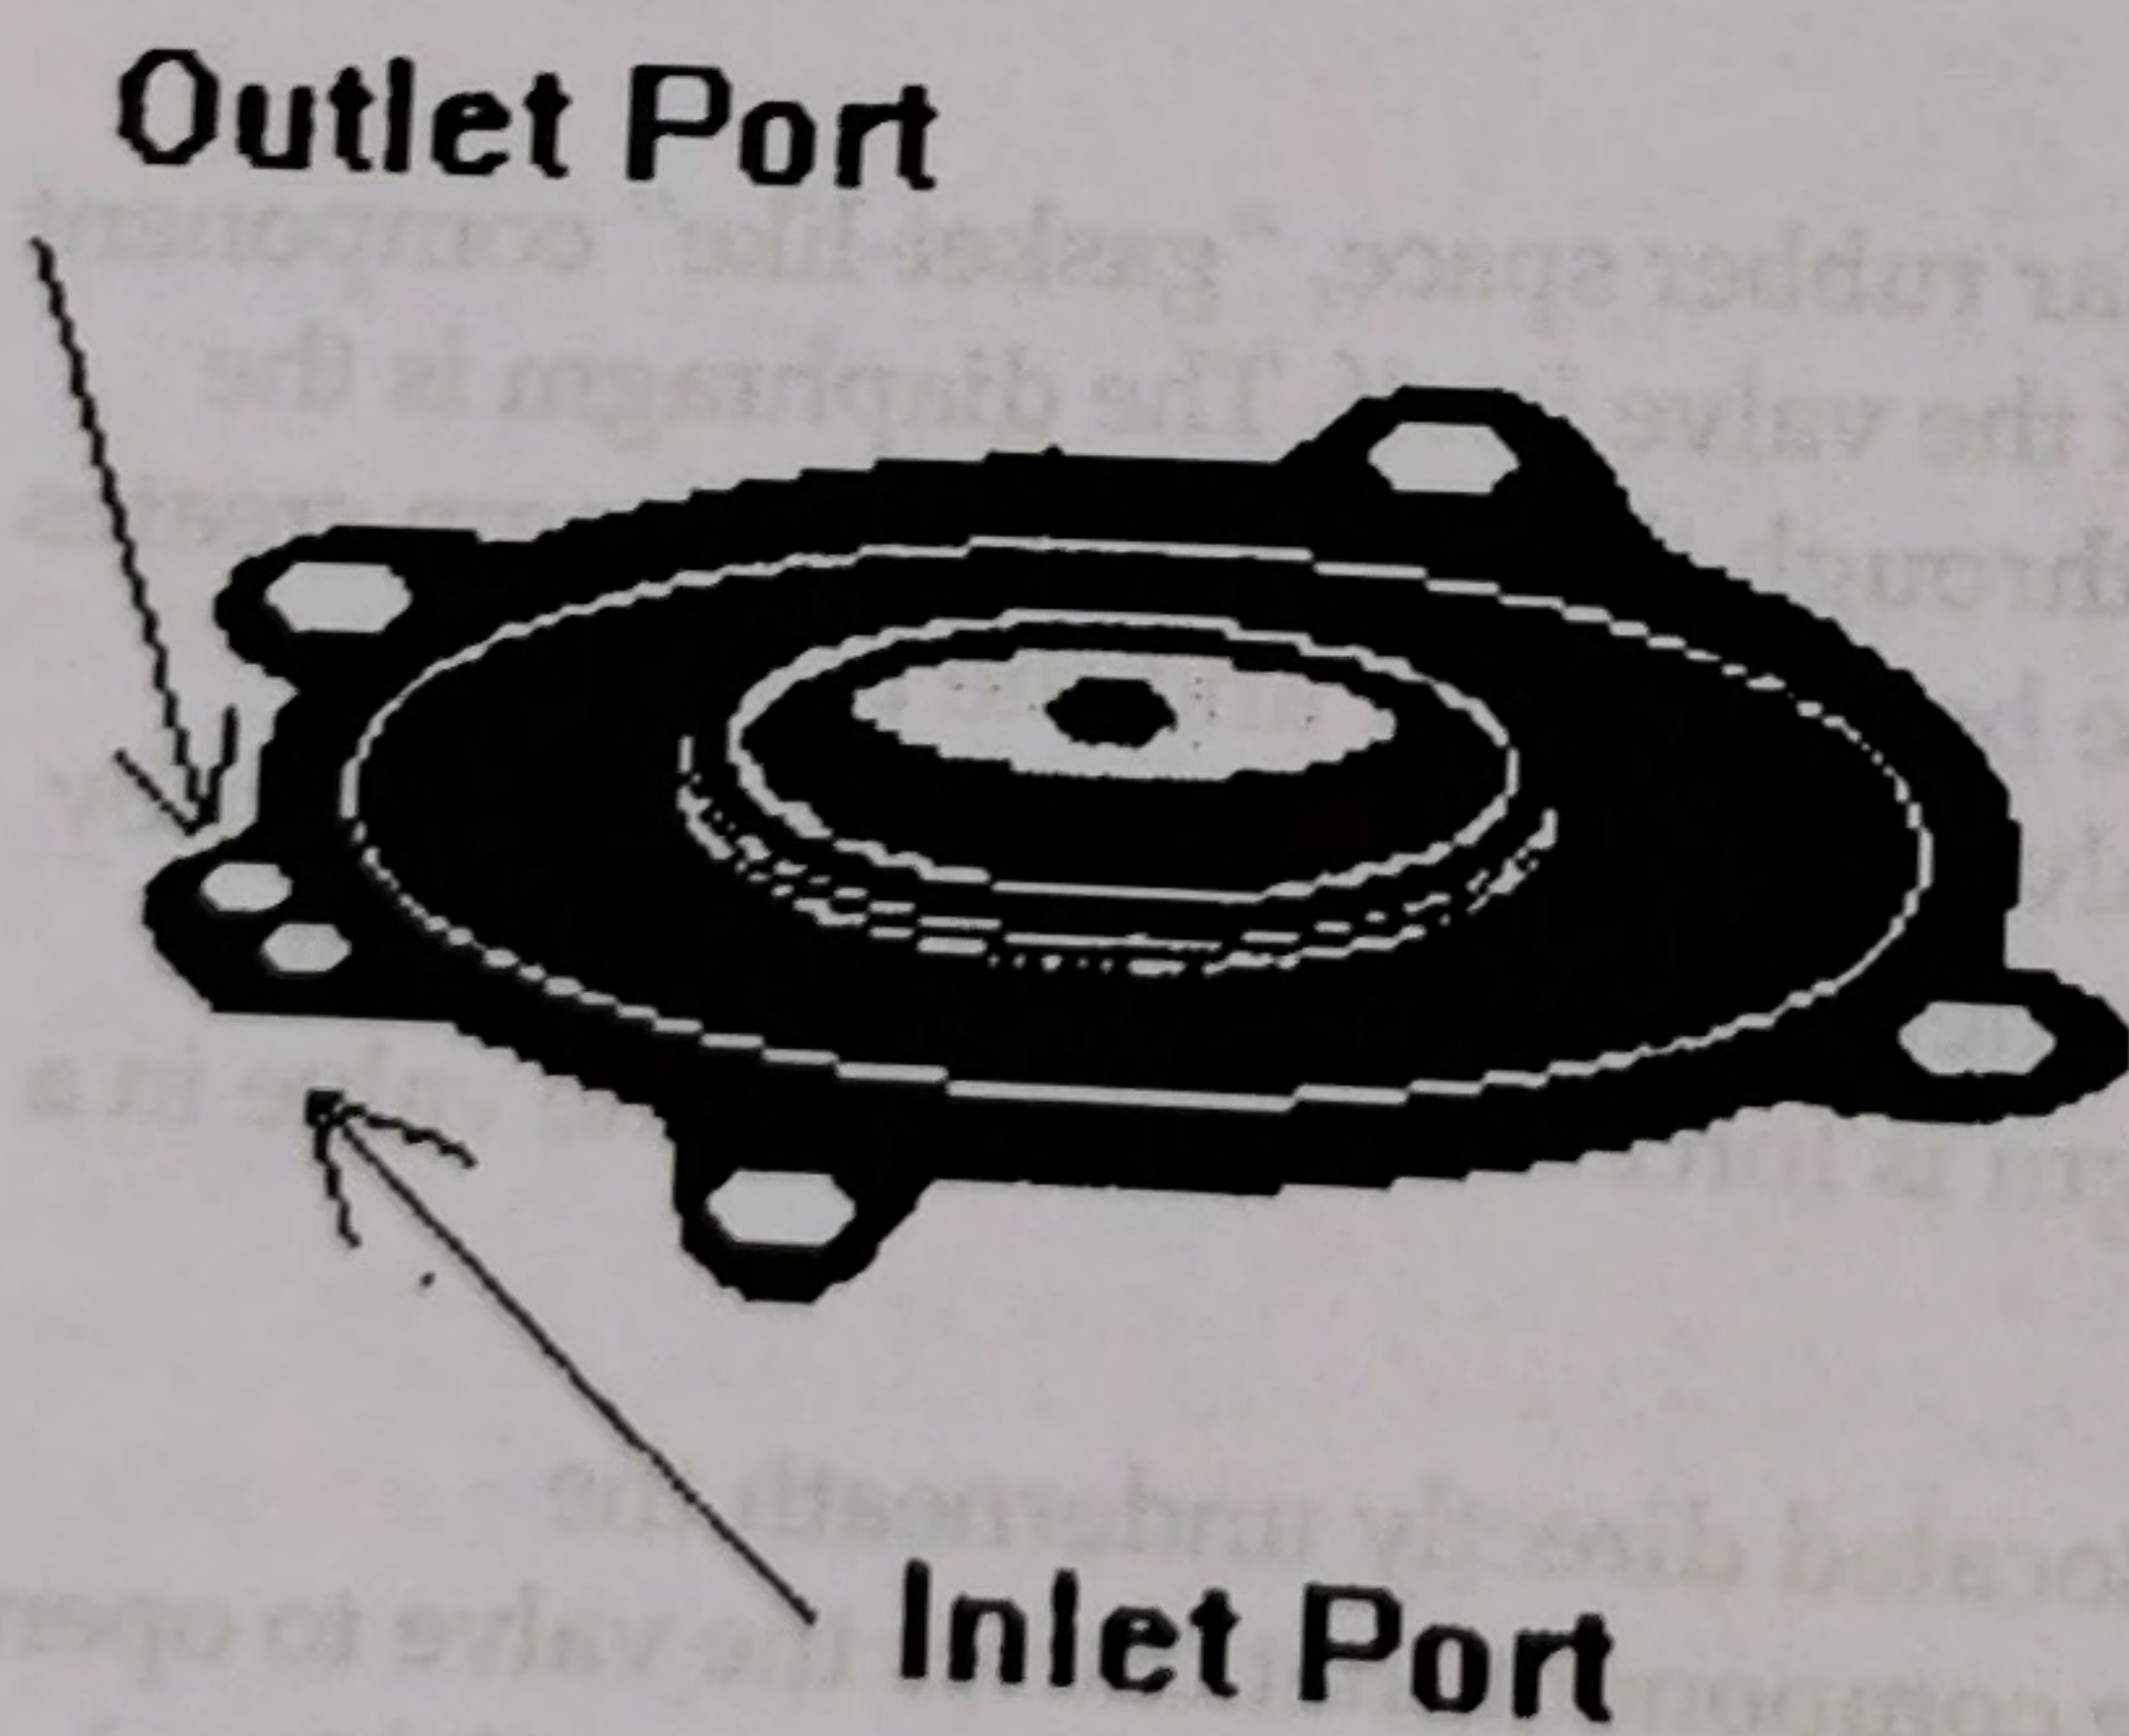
The Rainbird™ EF series valve has a seat assembly molded into the diaphragm assembly
